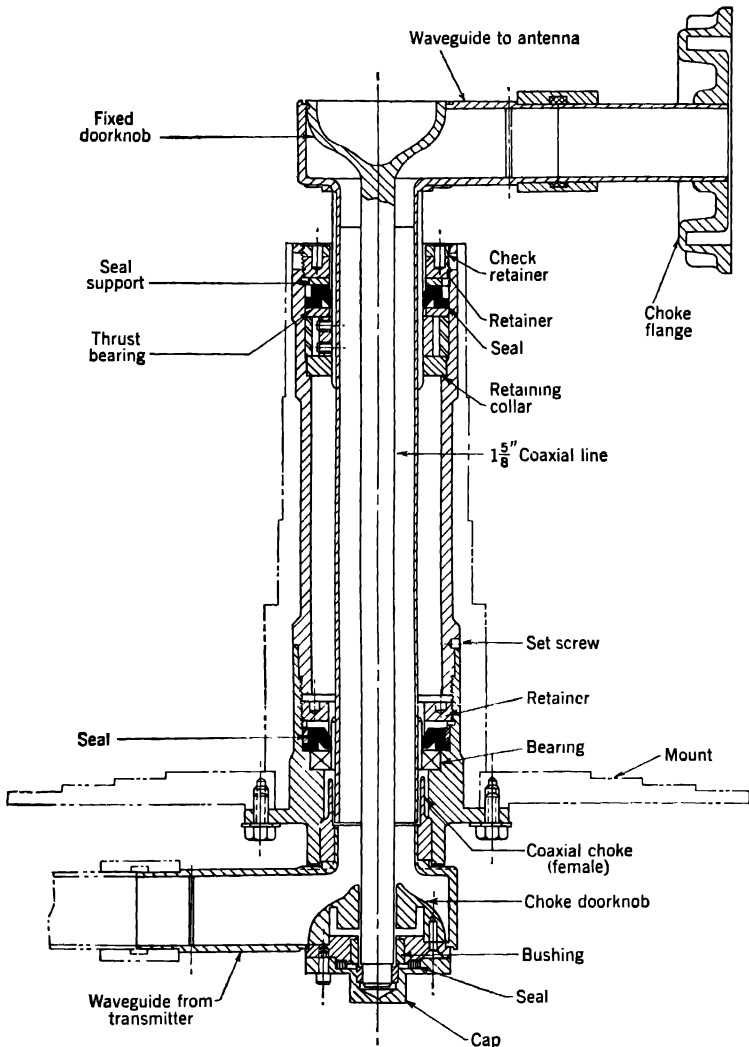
R-f rotary joint ("doorknob" type).
